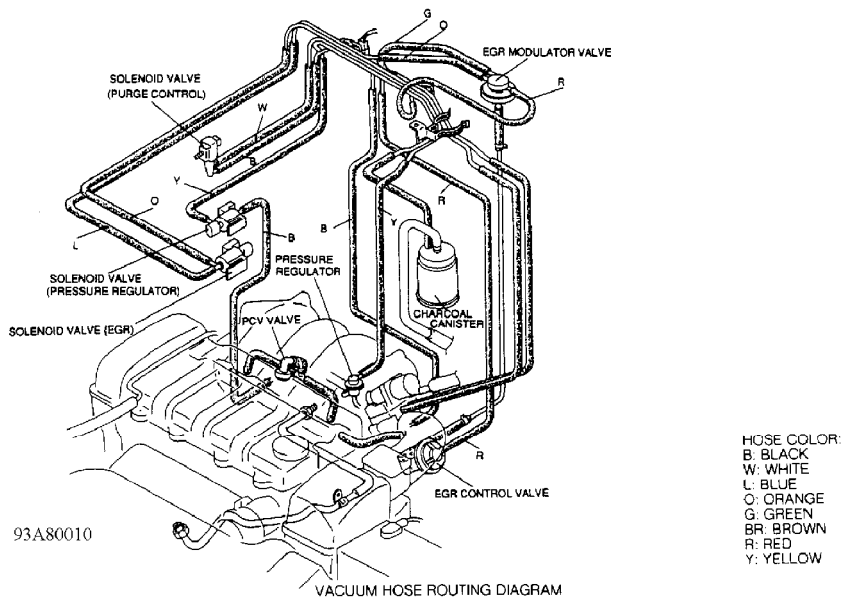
Vacuum Hose Routing Diagram (MX-6 2.0L & 626 2.0L)
